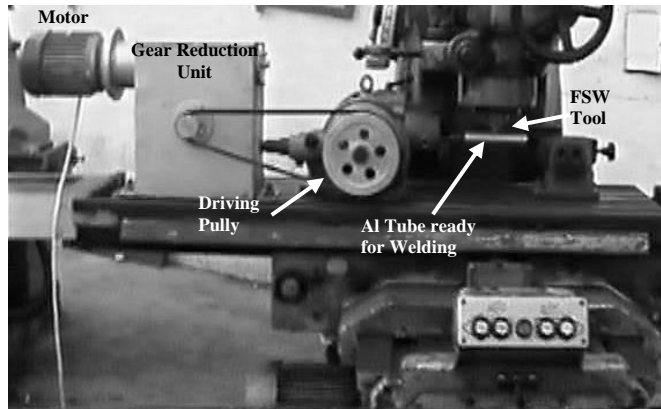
A photograph of an end mill with the stir welding reduction unit set-up used for tube welding.
